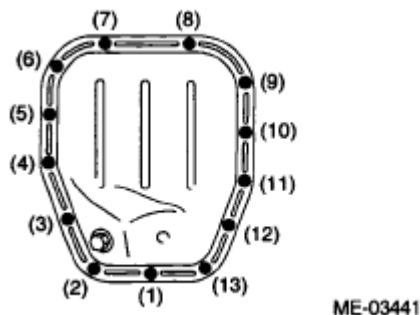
Identifying Oil Pan Lower Installing Bolts Tightening Sequence
